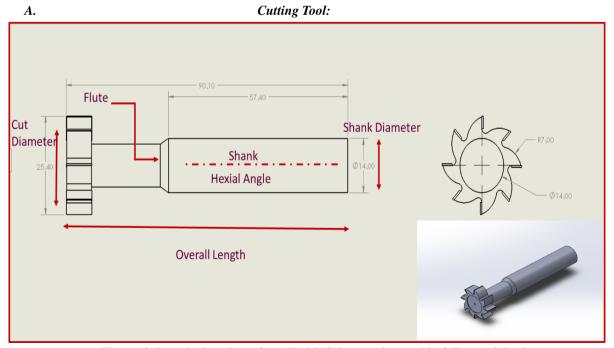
Descriptive view of the End Milling cutting tool in 2-D and 3-D view
